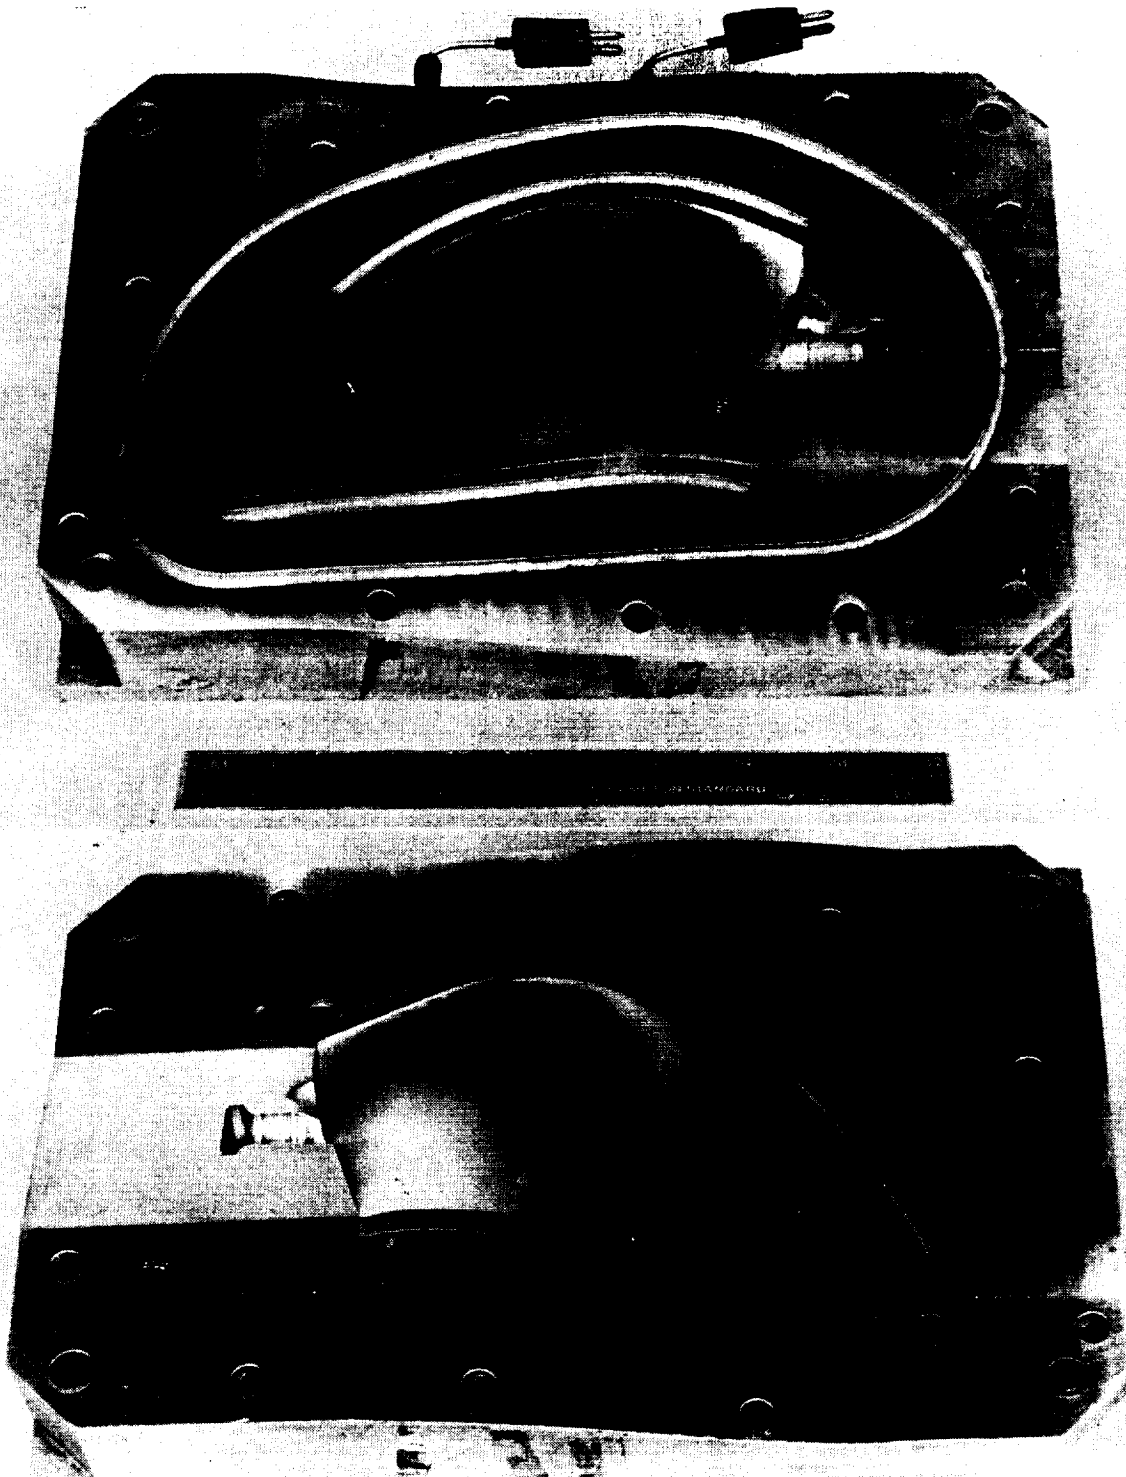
SR-7A RESIN INJECTION MOLD
